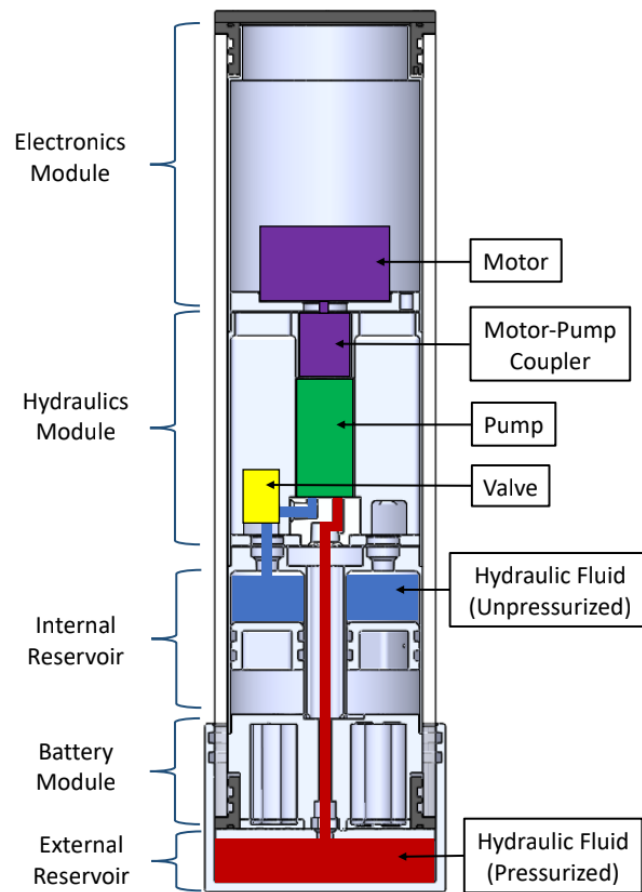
Cutaway view of the Lagrangian profiler developed by a Georgia Tech VIP team [3].
